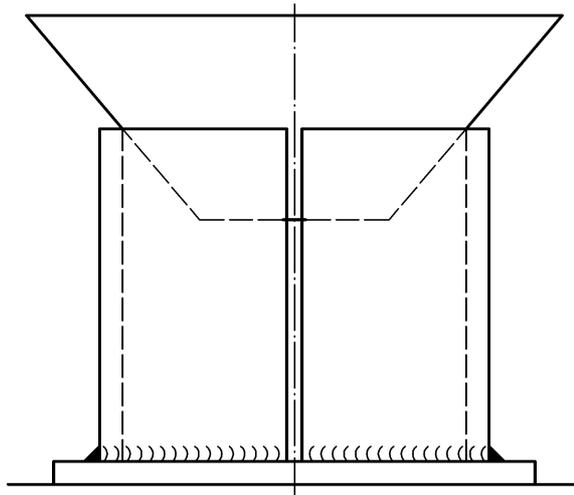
Preparation and fracture testing of test specimens for a fillet weld on pipe
